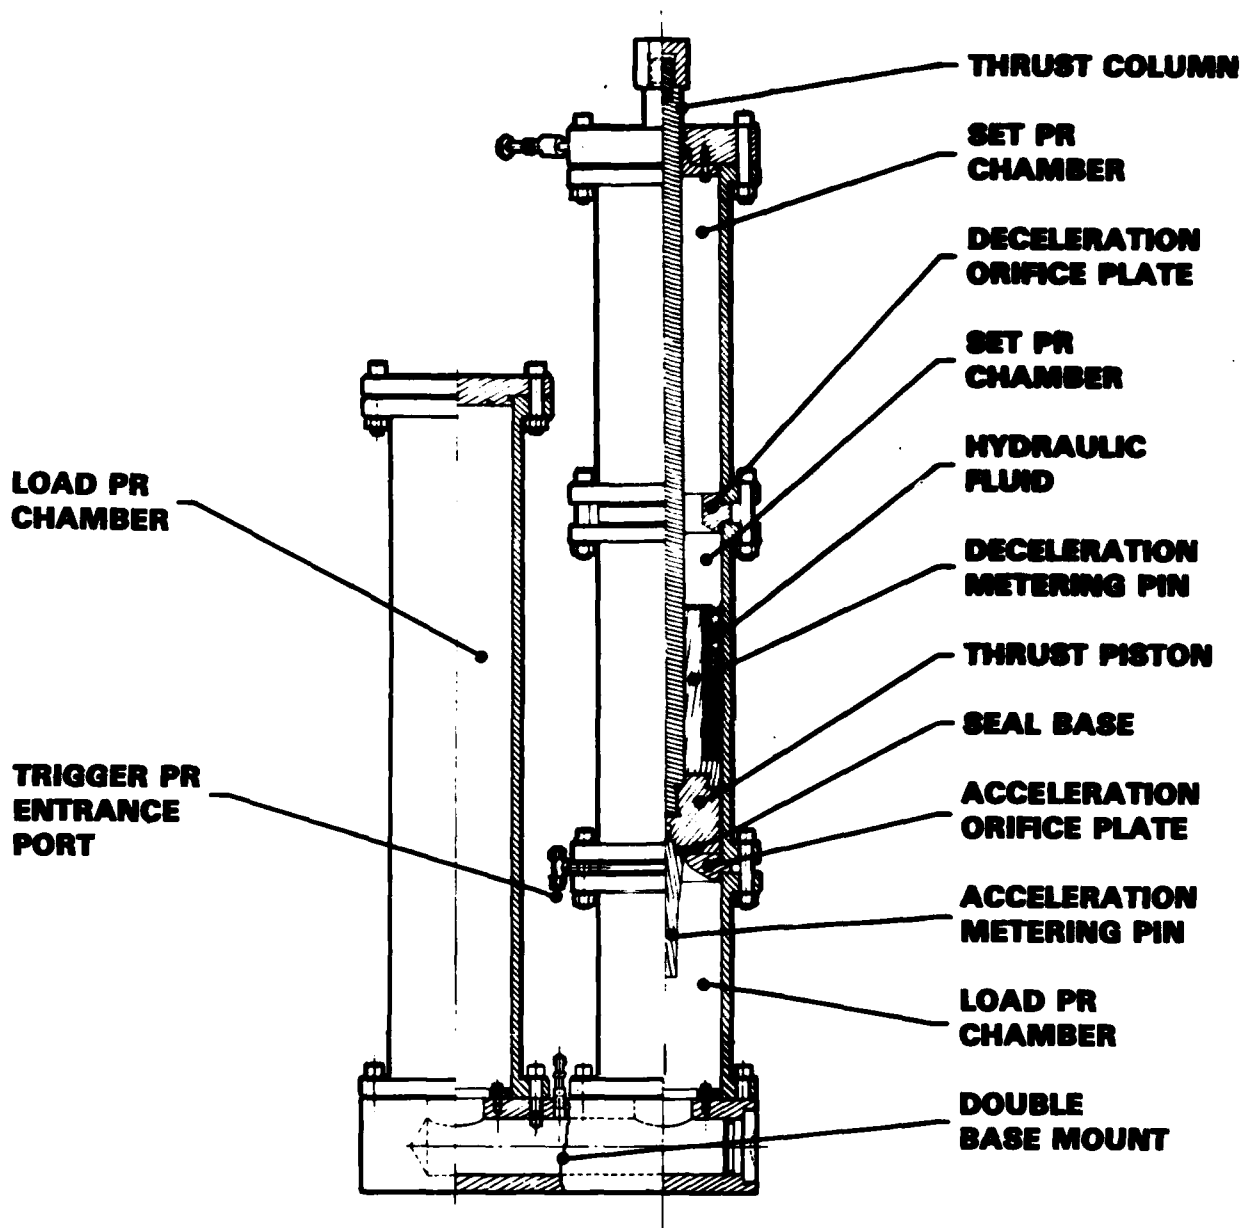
SHOCK ACTUATOR ASSEMBLY. TYPE HY-6407.
